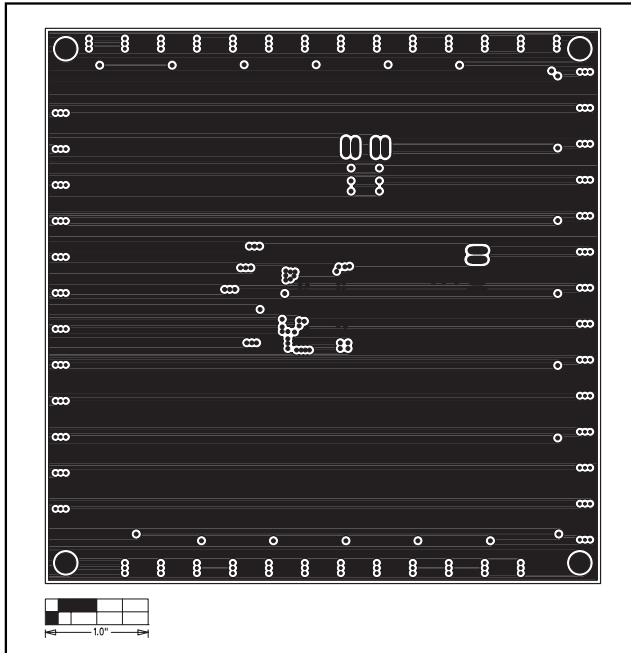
MAX9311 EV Kit PC Board Layout—Inner Layer 3 (VCC)
